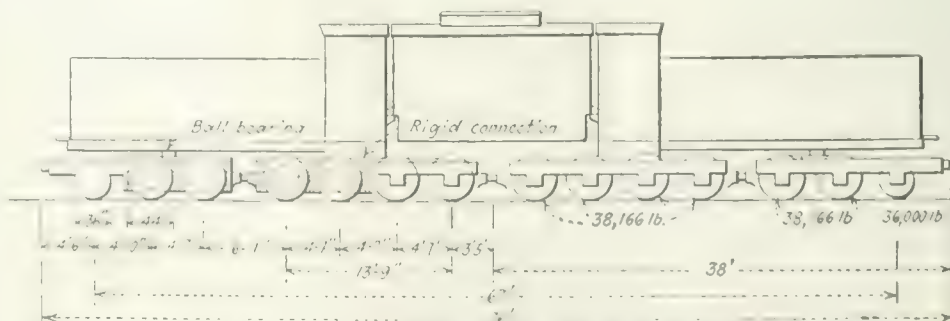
CHICAGO, MILWAUKEE & ST. PAUL PASSENGER
